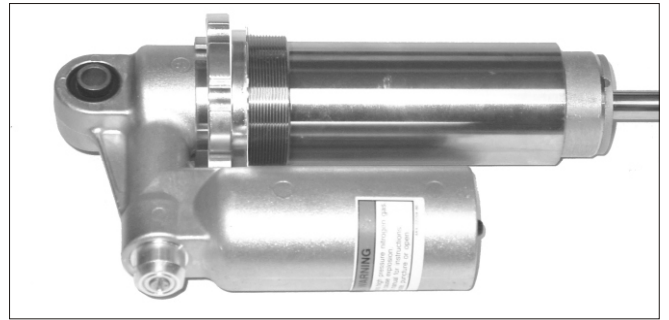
Install sleeve with preload nut in place. Use the large spanner to screw the sleeve into position. Note that the step on the preload ring is at the left.
